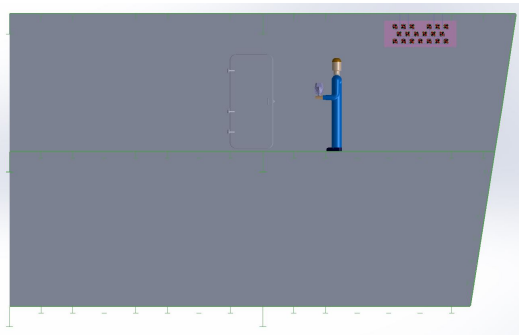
Power Corridor Ship Bulkhead Connection View Looking Aft
